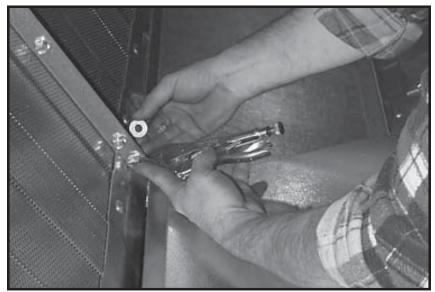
Loosely bolting with bolt/washer (dryer seam) washer/locknut.
